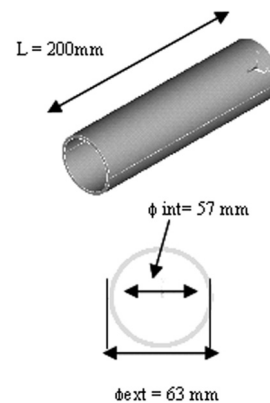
Dimensions (in millimeter) of samples of the test tube for the impact test
